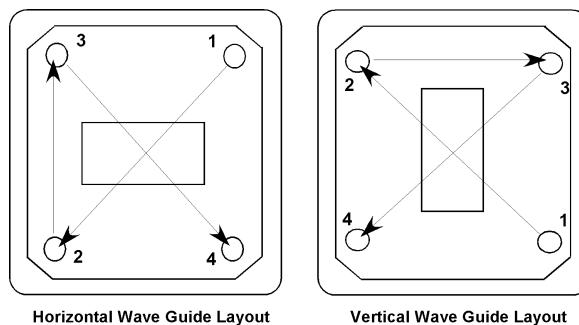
, Typical 4 Screw Mounting Flange Tightening Sequence
